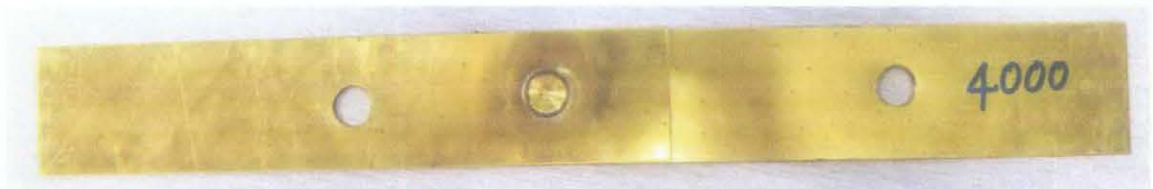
Lap-shear spot friction weld specimen of copper alloy with 4000 rpm
